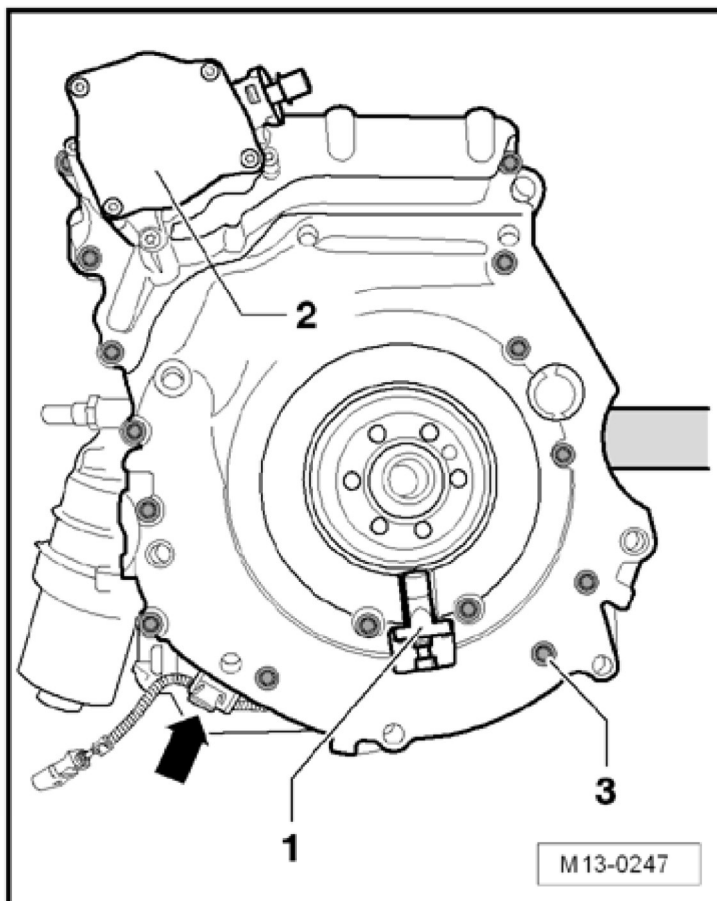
Identifying Removal Points For Control Housing Cover -1- From Cylinder Block -2- And From Upper Oil Pan -3-
